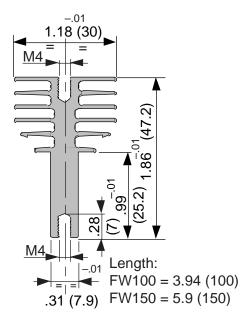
FW100 and FW150 heat sinks; dimensions in inches (mm)
